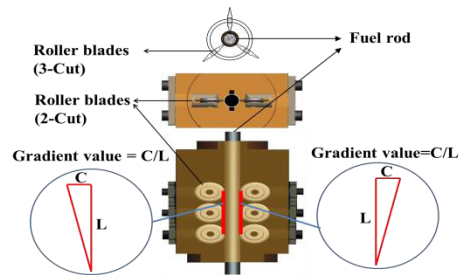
Rollers gradient of 2-CUT and 3-CUT module.
